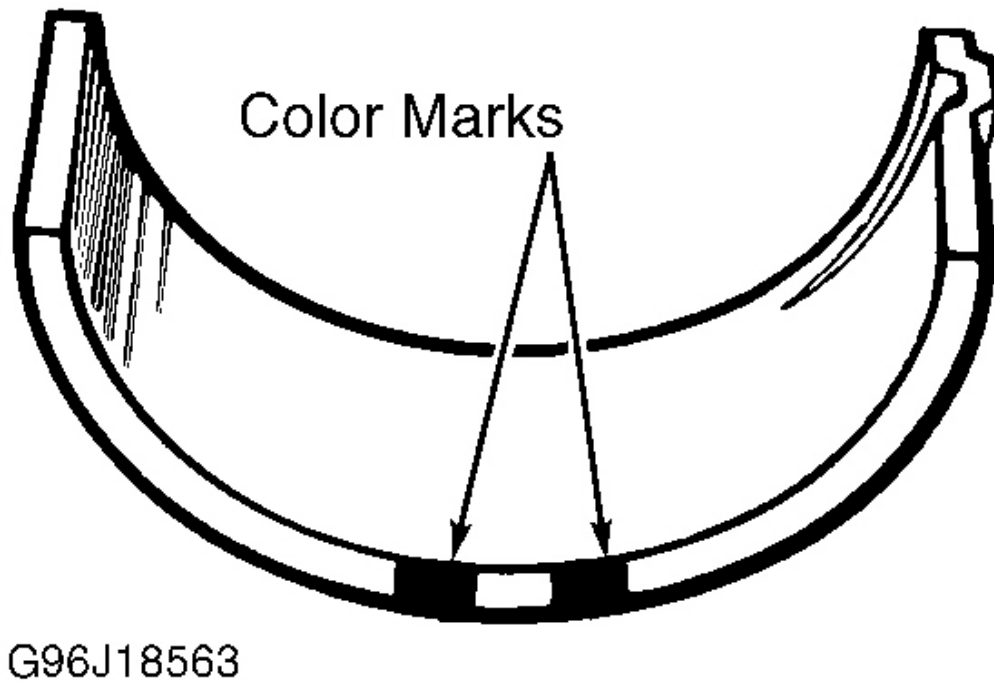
Identifying Main Bearing Color Codes - Undersize Bearing
